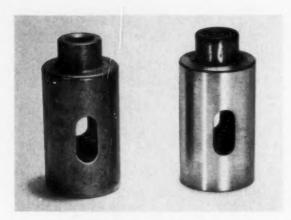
Engine tappet de-burred and edge-radiused by barrelling (left) and after finish grinding to size (right)
